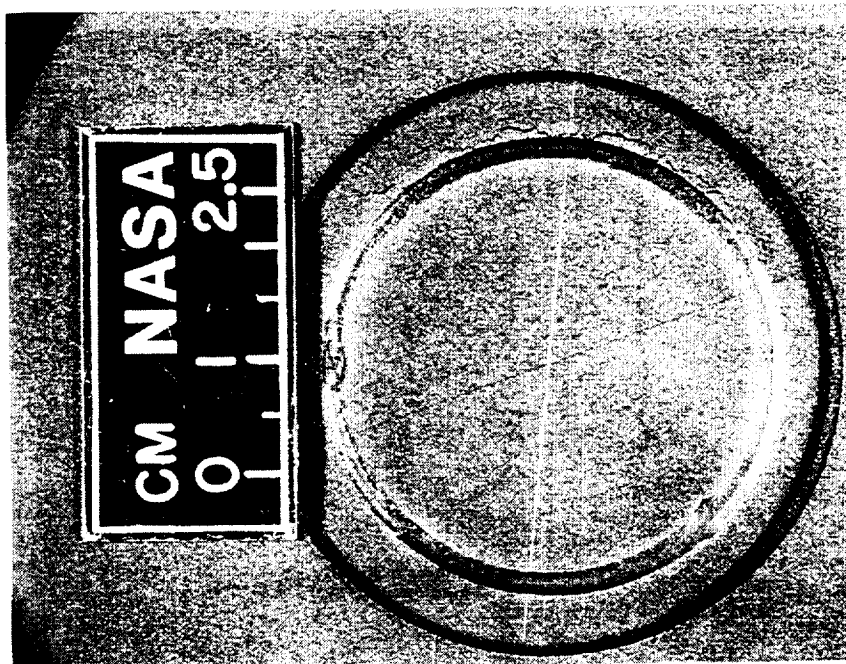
Cracking in a Simulated Repair Weld - 10.2 cm Diameter Specimen
